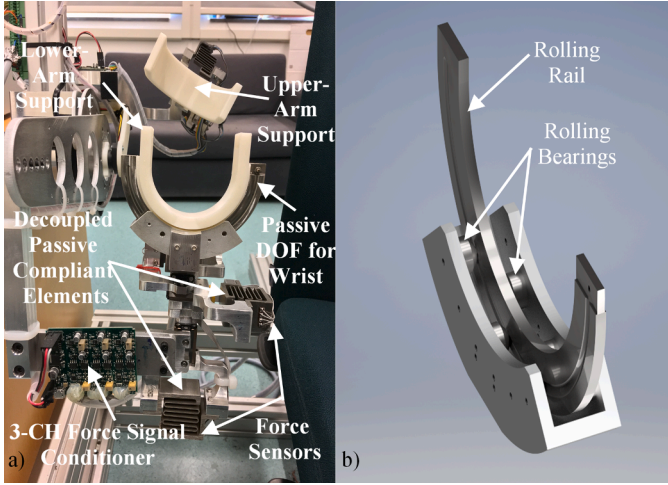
(a): Close up view of realized lower-arm support (b): Close-up view of mechanism for frictionless passive wrist movement.
